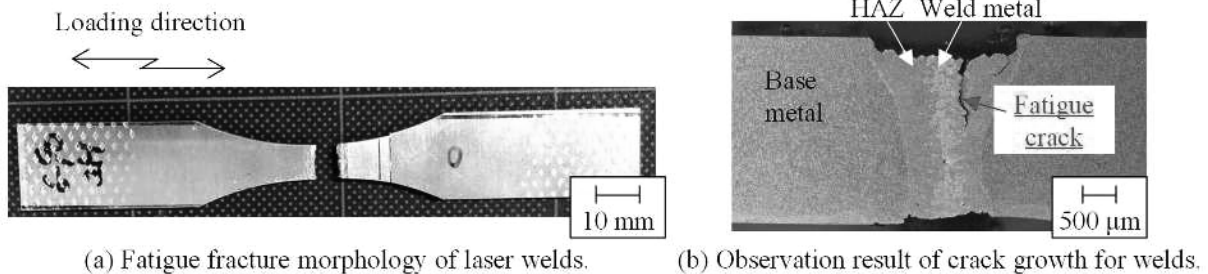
Fatigue fracture mechanism of laser welds.
